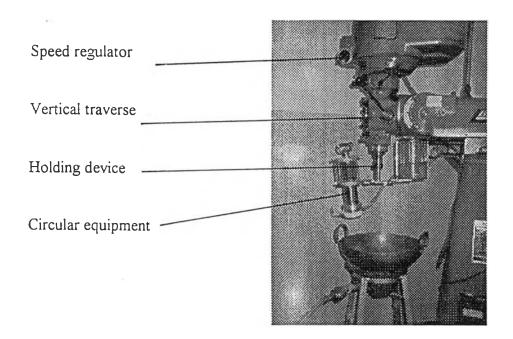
Installation of circular motion equipment with vertical milling machine
